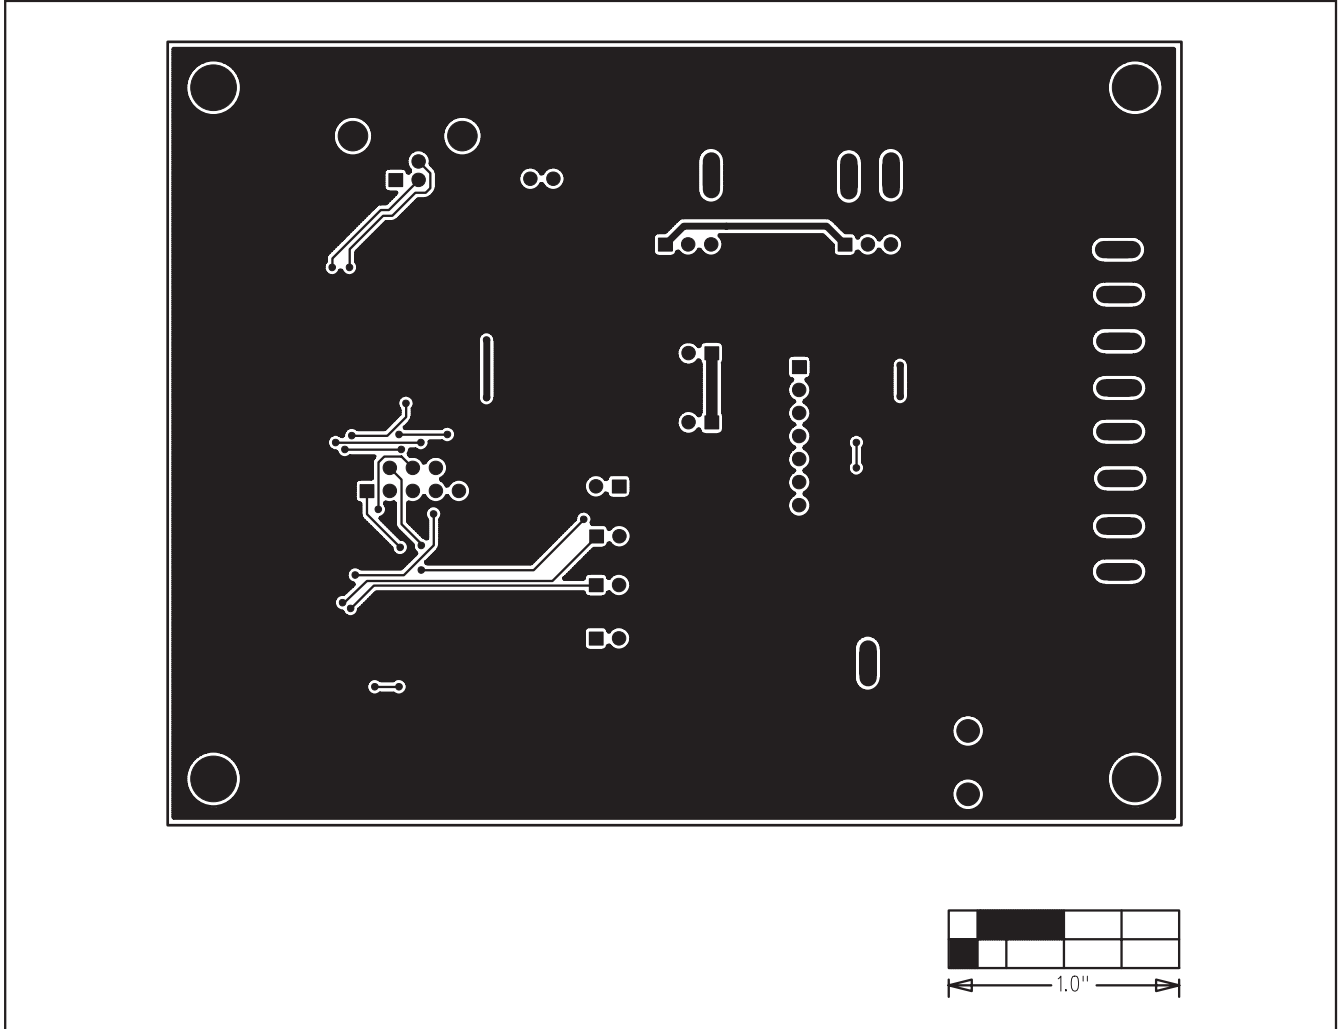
MAX14521E EV Kit PCB Layout—Solder Side
